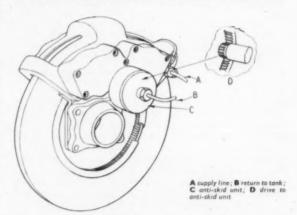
A diagrammatic illustration of a proposed scheme for incorporating the Maxaret unit integrally with a twin-spot type disc brake
